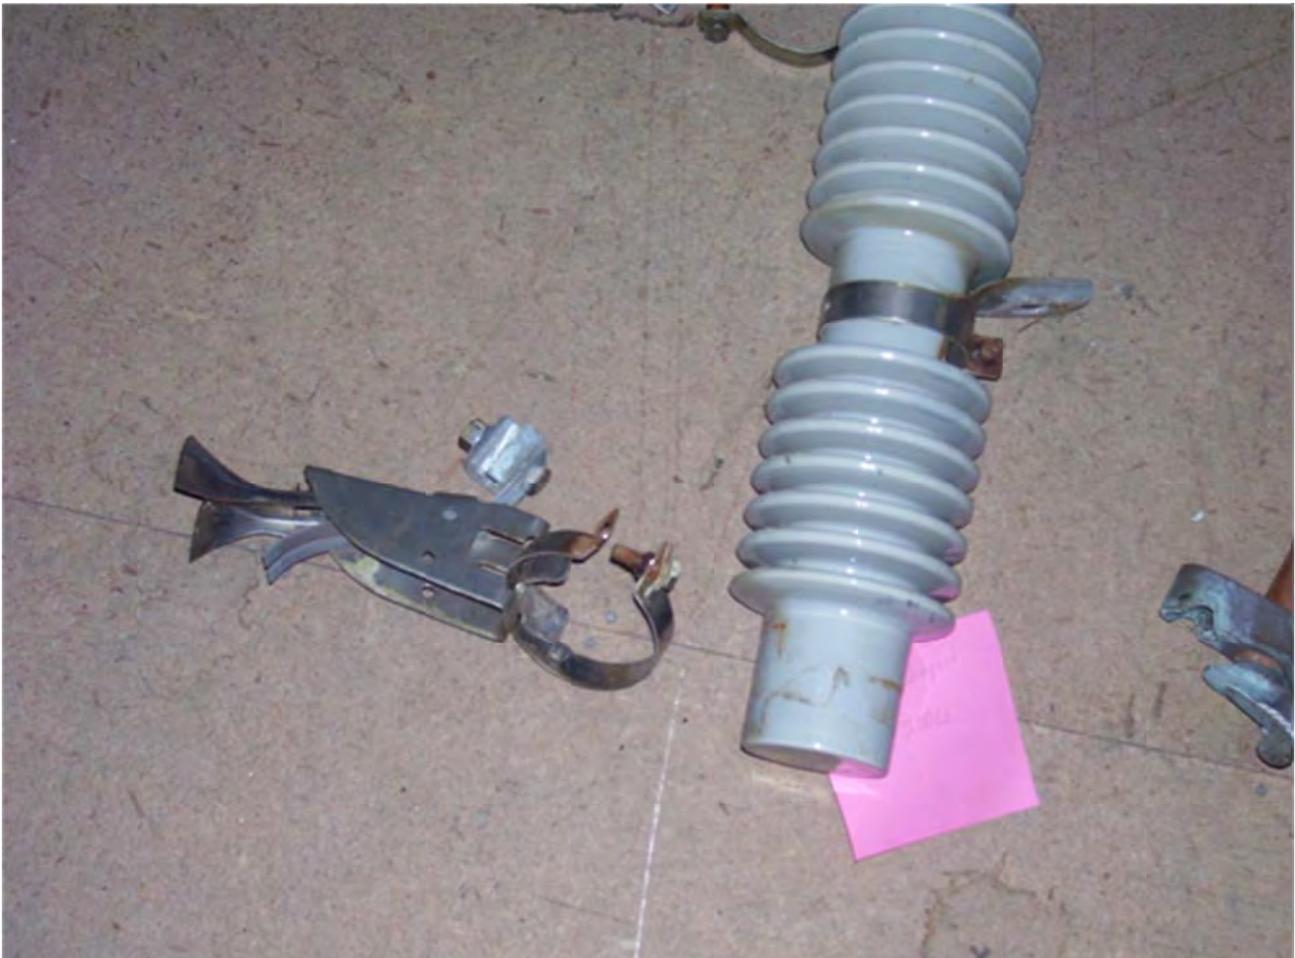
EXAMPLE OF FAILURE OF A DROPOUT FUSE.
